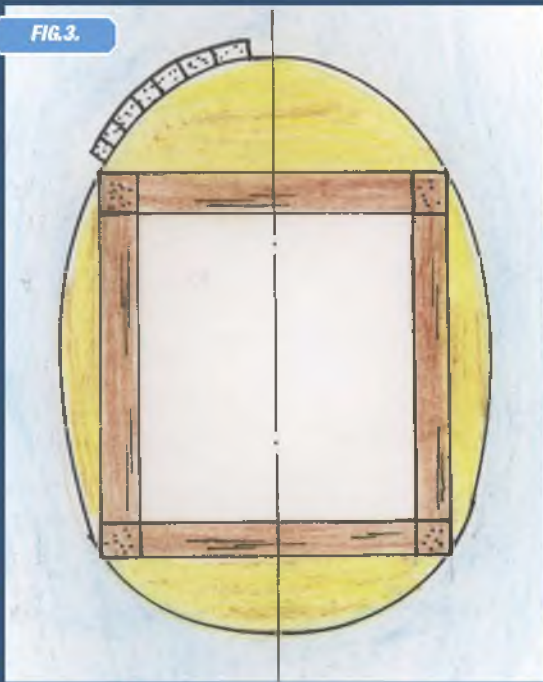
The forward fuselage Features: A thick ply front former and a spruce main frame. The black dots show wing the spar, undercarriage attachment, engine mounting and cabane strut attachment points, making one strong, unified structure.
